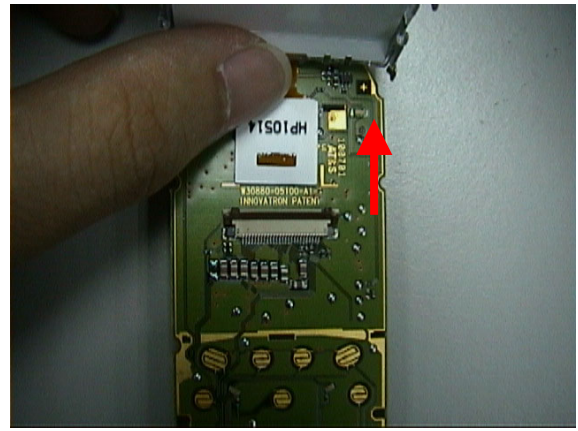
DISASSEMBLE A50— STEP 6
